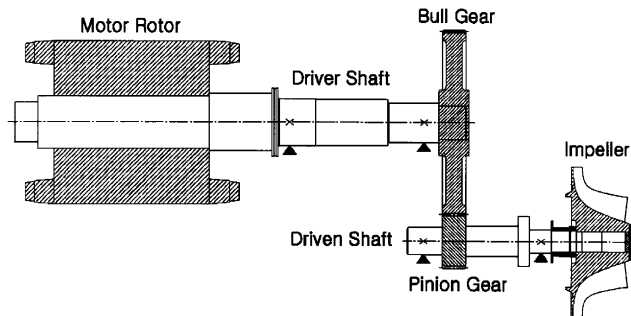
Schematic of a 600 kW turbo-chiller rotor-bearing system.
